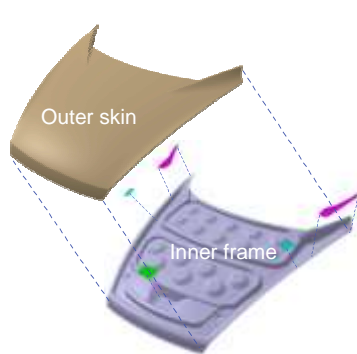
Exploded view of the hood assembly showing HPPC outer skin and inner frame with metal inserts for hinges, gas-struts and latch.
